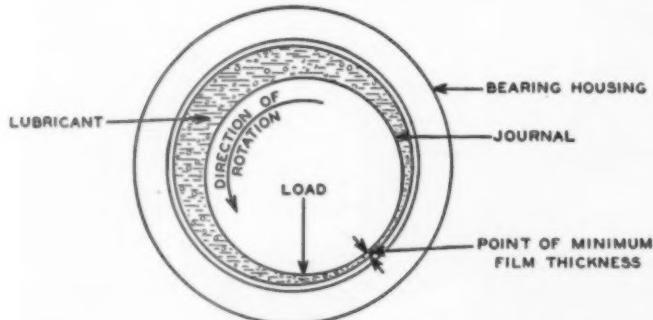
Showing the position assumed by a rotating shaft in a bearing
